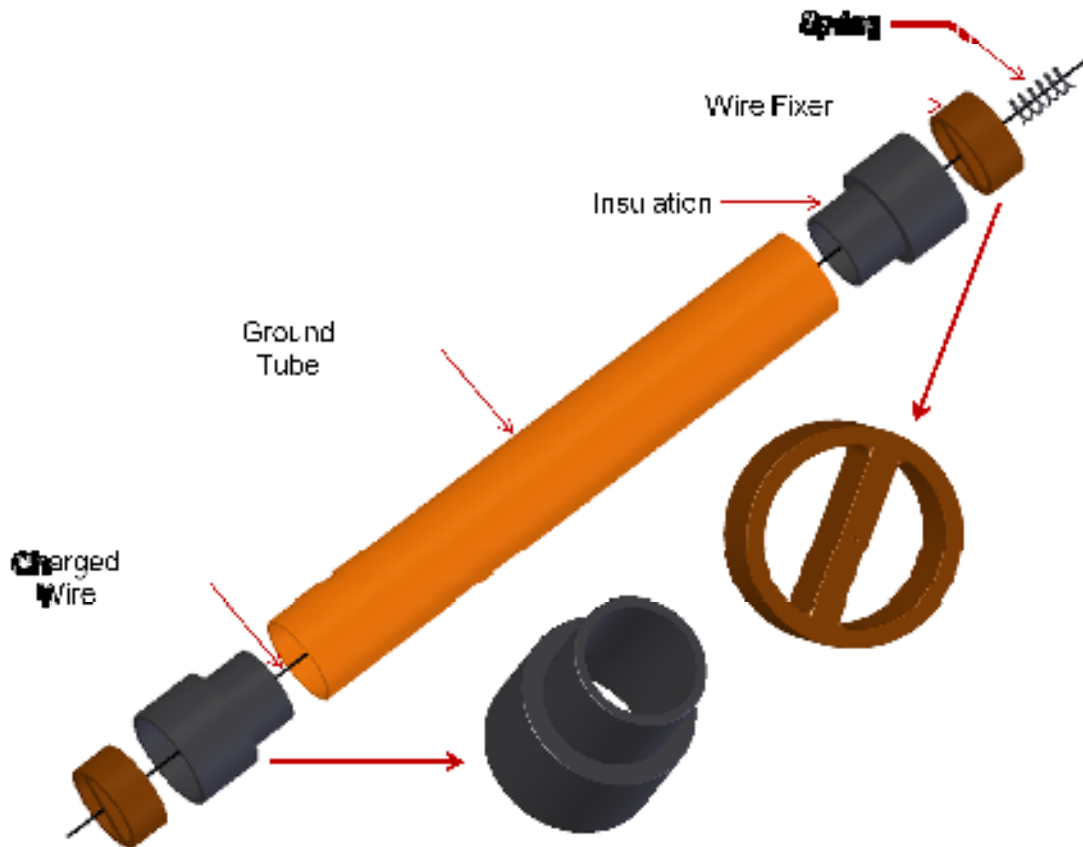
Schematic diagram of wire-tube electrostatic separator
